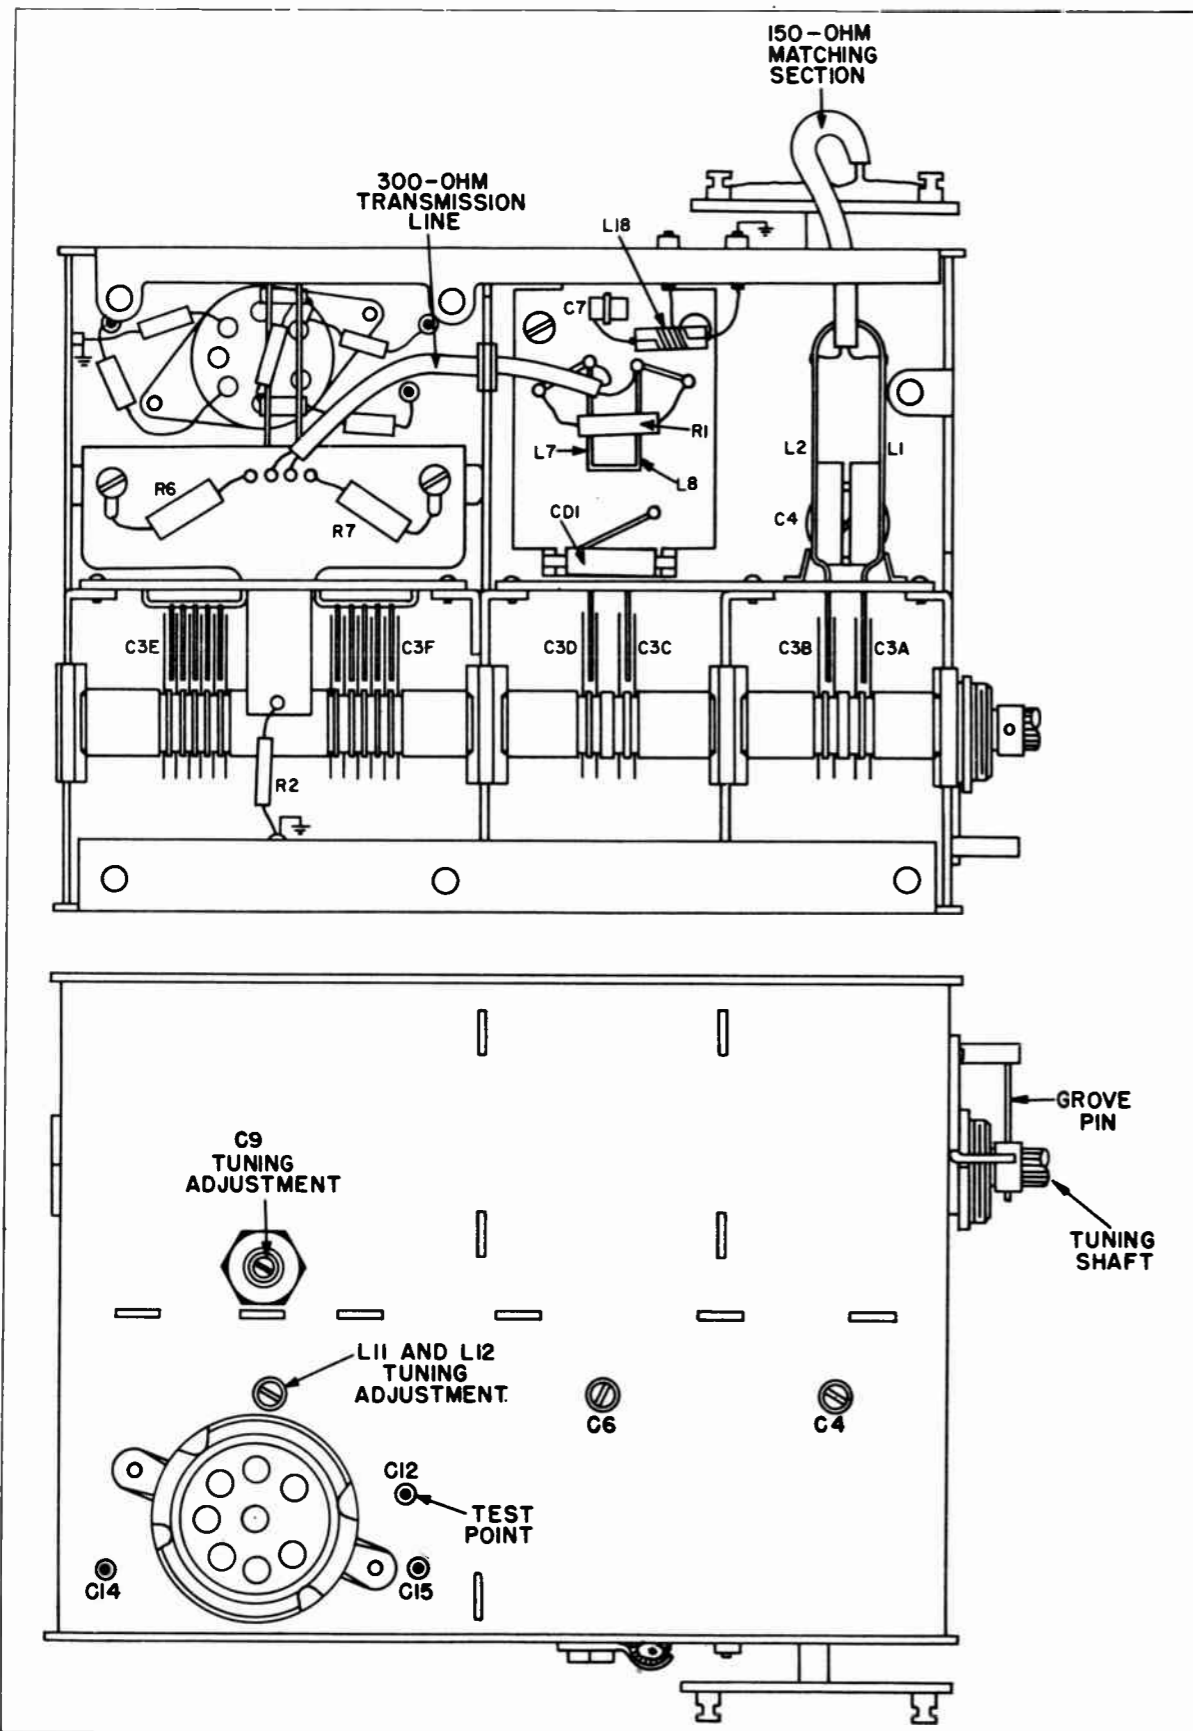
Top View and Base View of Tuner-Adapter UT20A, Part No. 43-6591, With Board Assemblies
